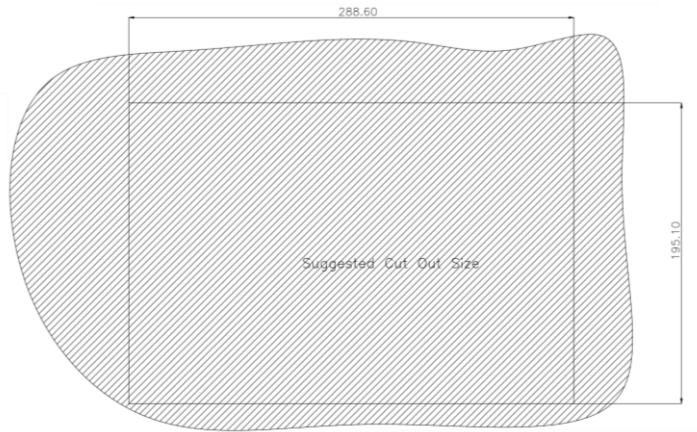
AURA-W121-RK3576 Panel Cutout Dimensions
